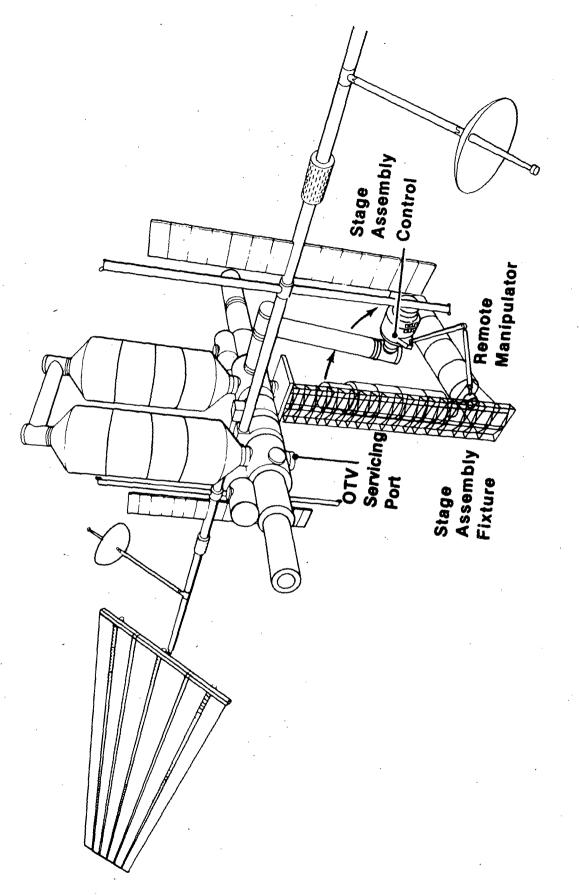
Planetary Vehicle Assembly Fixture
